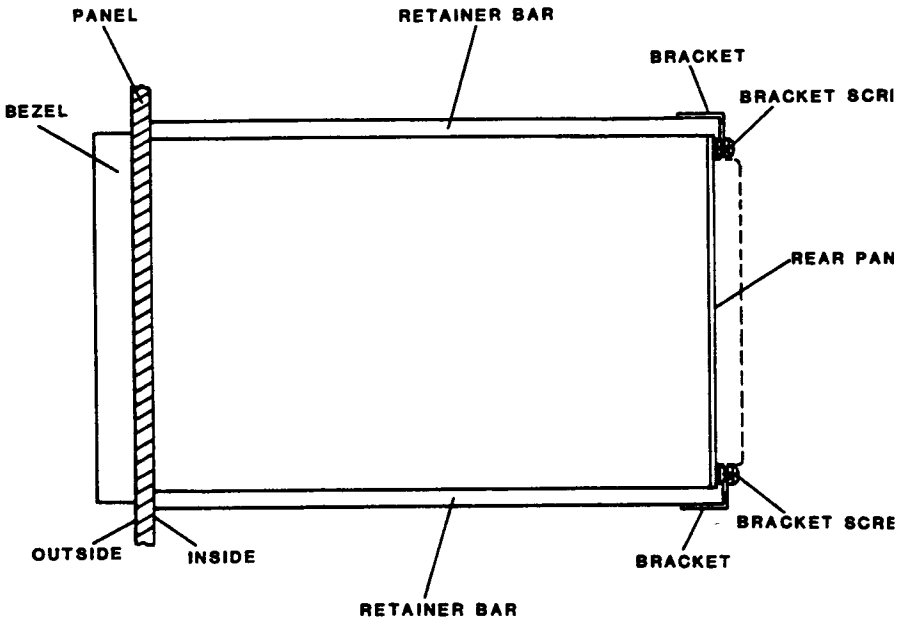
PANEL MOUNTING THE INDICATOR
